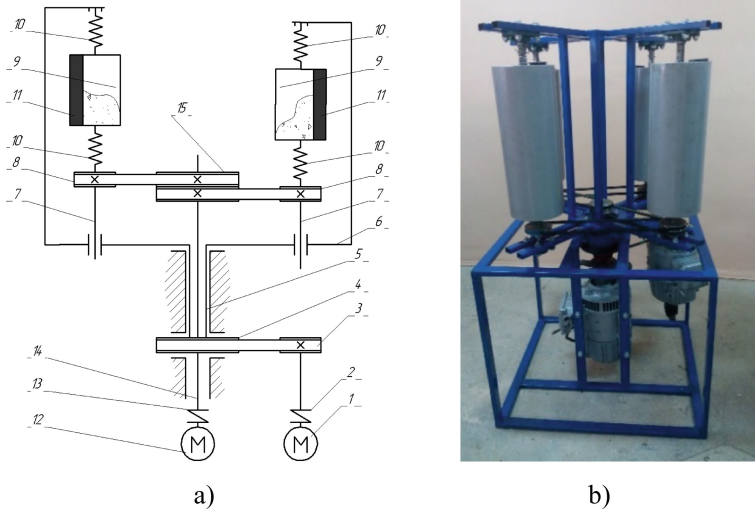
Vibration-planetary machine: a) schematic diagram; b) appearance; 1, 12 – drive motors; 2, 13 – elastic couplings; 3, 8 – V-belt transmission; 4 – driven drive pulley; 5 – hollow shaft; 6 – carrier; 7 – container drive shaft; 9 – container; 10 – springs; 11 – drum weight assemblies; 14 – central shaft; 15 – central pulley.
